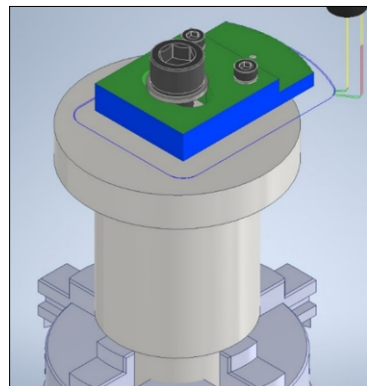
The device clamped in the chuck with the workpiece* [2]
